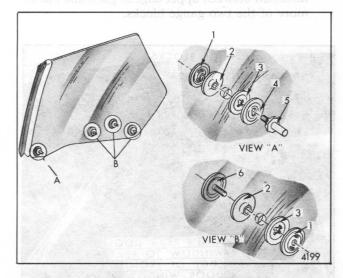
Rear Door Window Assembly - "B and C-39, 49" Styles
